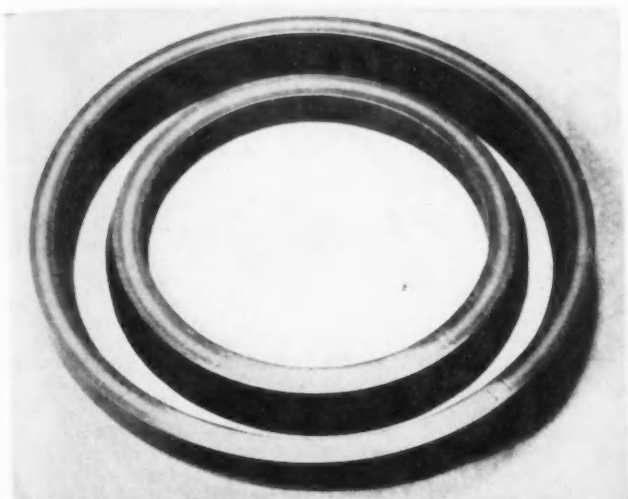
Stresses imposed by the core of this roller bearing race cracked the case
